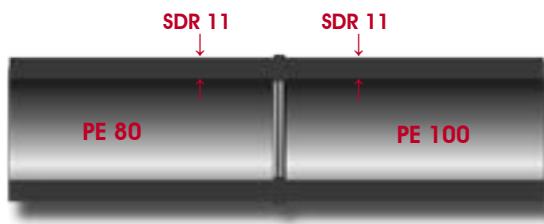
Butt welding / Figura 1. Saldatura testa a testa / Figura 1. Soldadura a tope
